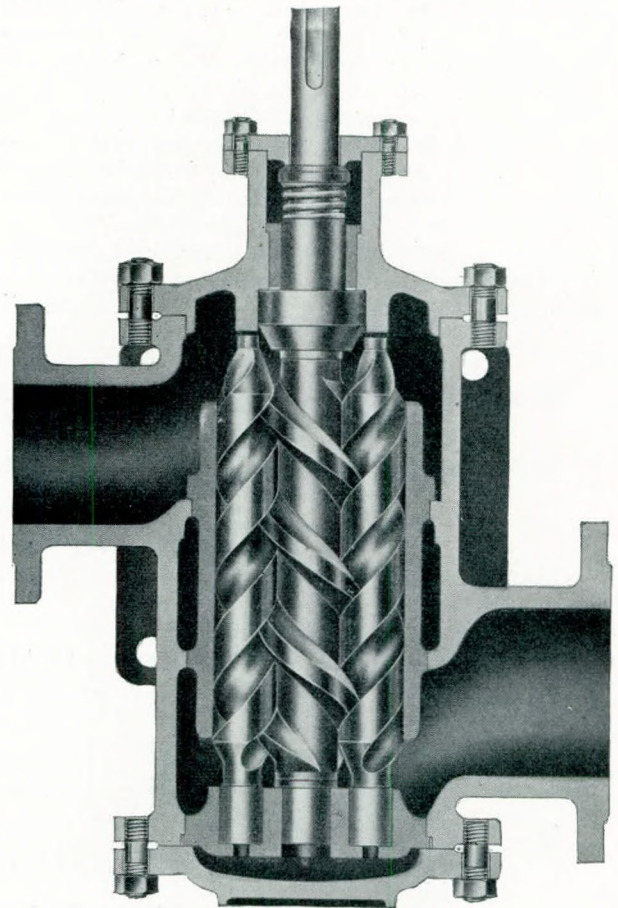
Design of Imo pump, showing the three rotors in place.
